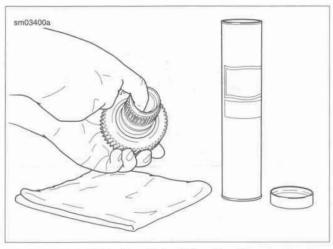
Lubricating Main Drive Gear Needle Bearing
